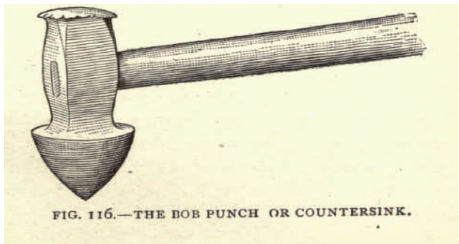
THE BOB PUNCH OR COUNTERSINK.
